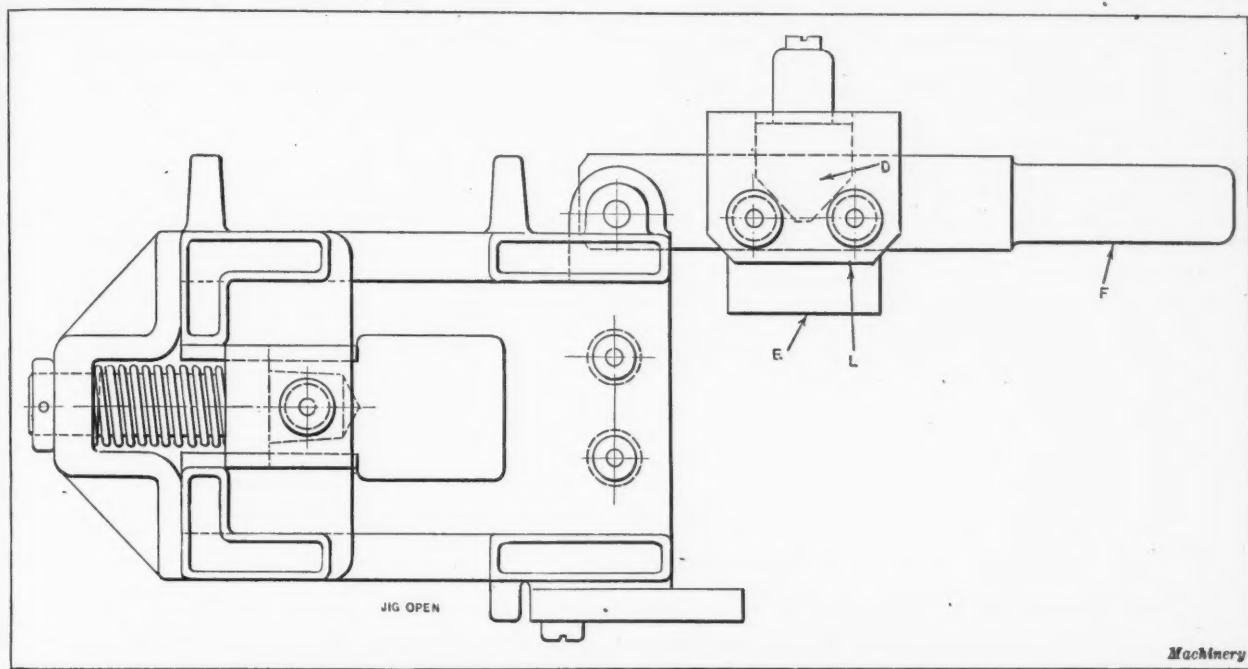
Jig shown in Fig. 1 with Clamping Lever swung Open
